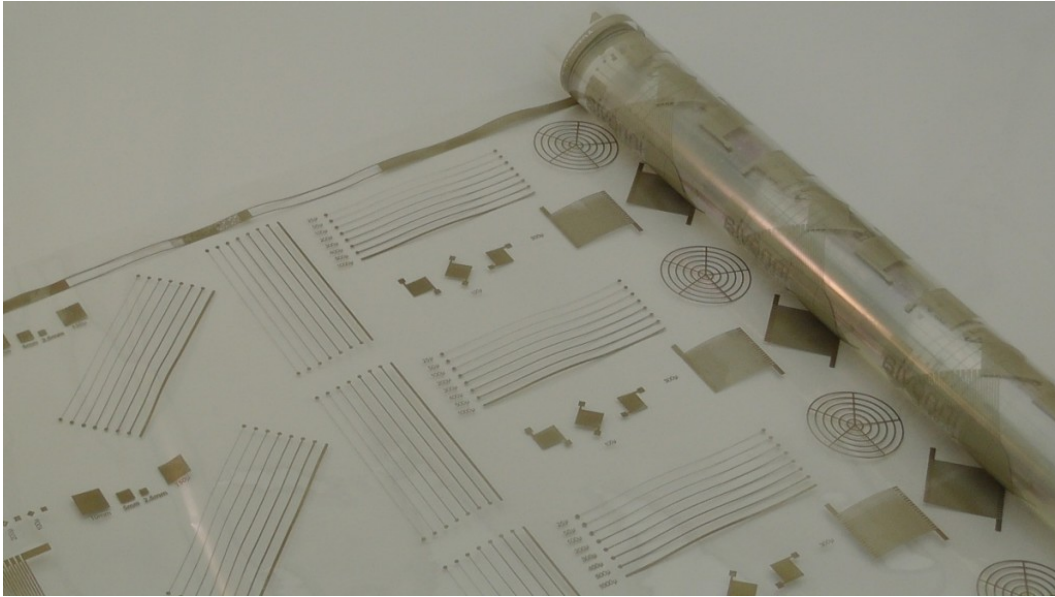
Long sheet of circuits printed on a Roll-to-Roll system. Source: PRINTED ELECTRONICS LTD
